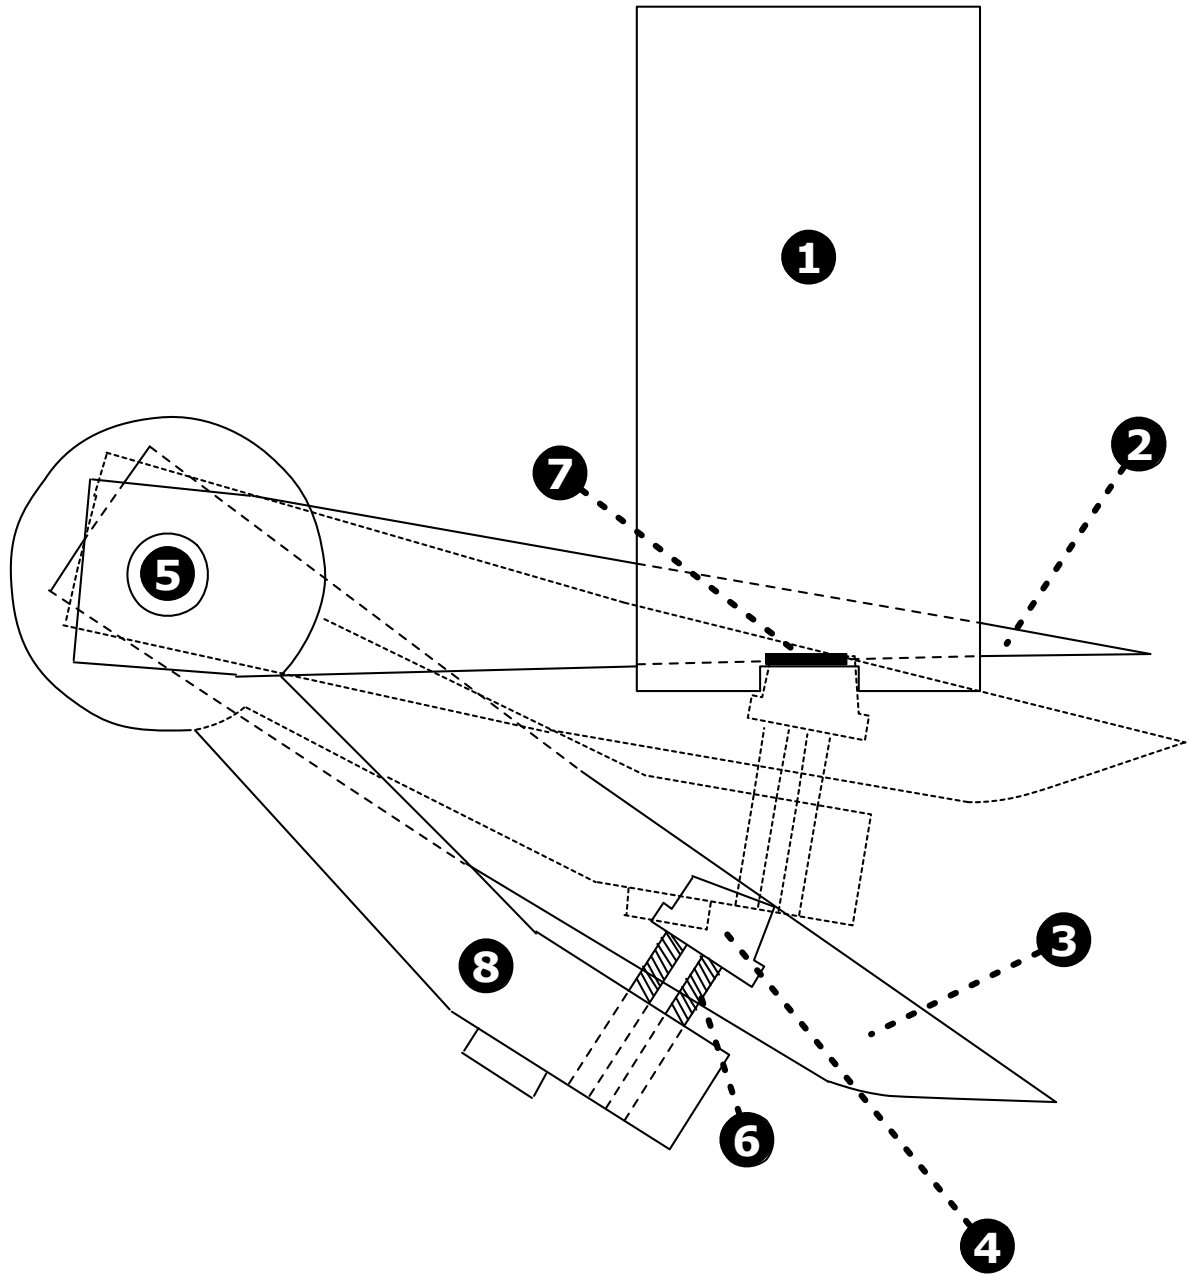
Top view of tow cutting mechanism; thick lines in payout position, thin lines in cutting position. Parts: ① cutting block, ② fixed blade, ③ moving blade, ④ top pressure pad, ⑤ drive shaft, ⑥ pressure pad springs, ⑦ tow, ⑧ cutting carriage arm.
